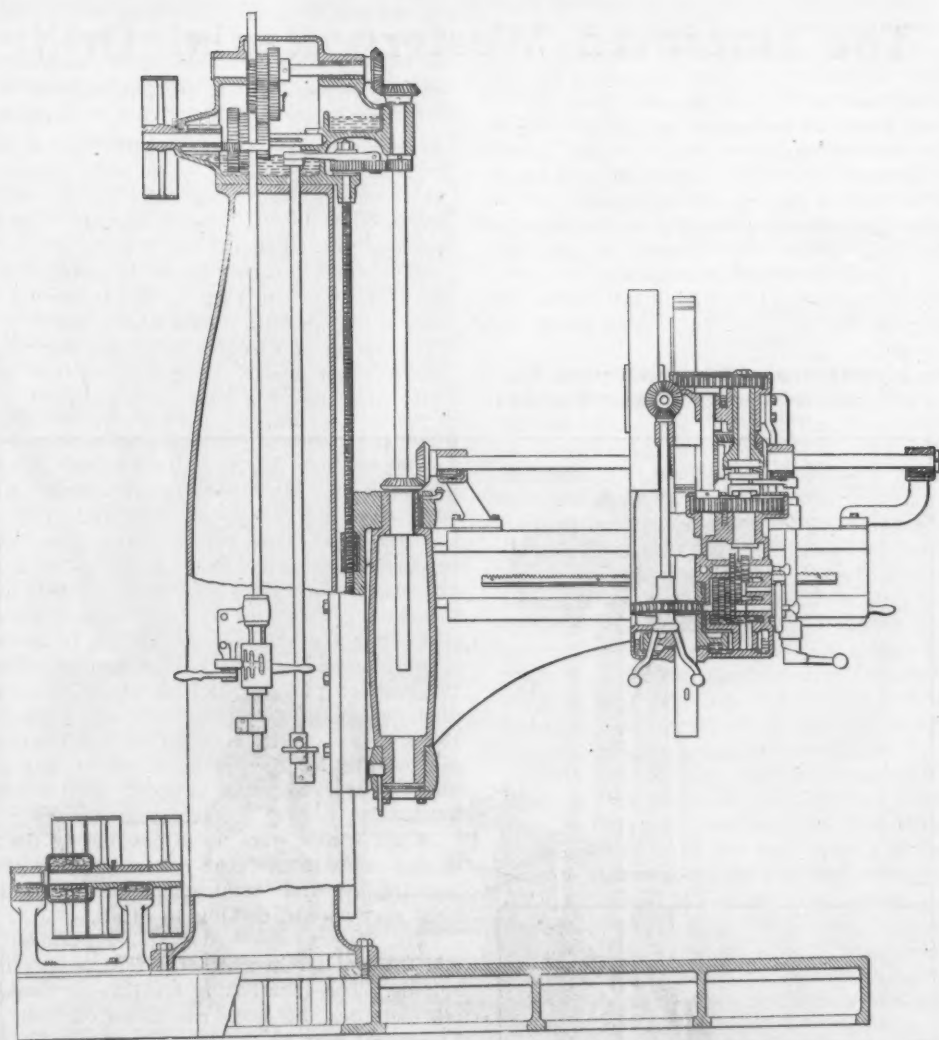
Elevation of the New Western Radial Drill with the Countershaft, Speed Box and Head in Section.
